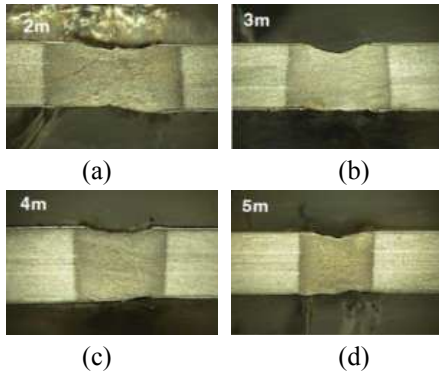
The section of laser welded specimens according to welding speed; (a) 2.0 m/min, (b) 3.0 m/min, (c) 4.0 m/min, (d) 5.0 m/min
